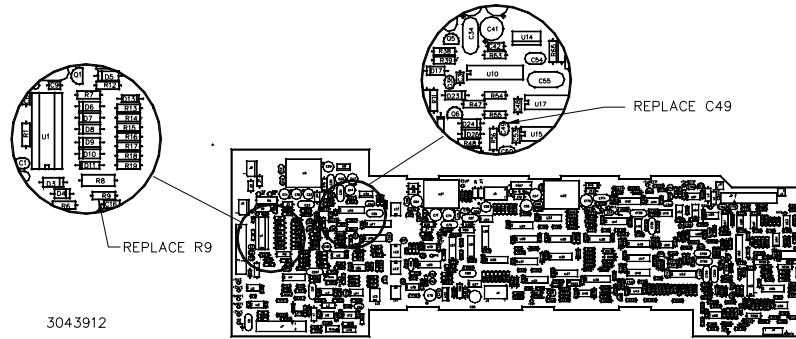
FRONT END CONTROL BOARD, A4A3, COMPONENT LOCATIONS
